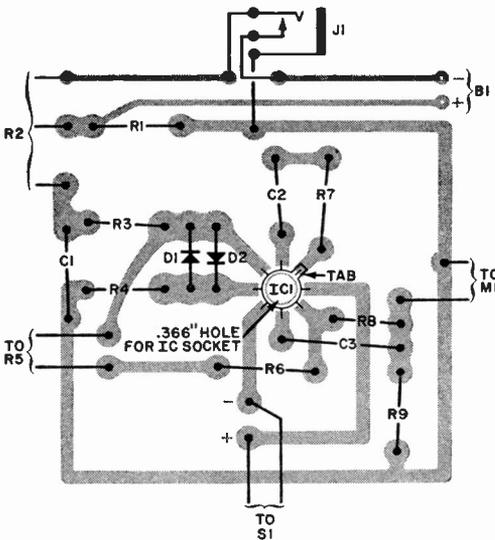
Install the components as shown here. Note that J1 is arranged to close when plug is inserted.
